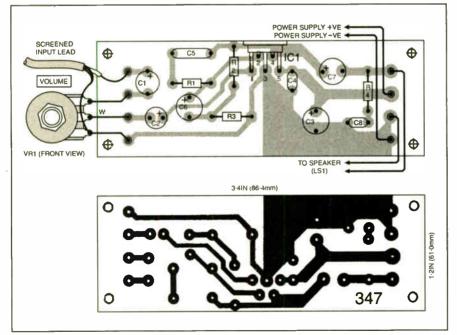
Printed circuit board component layout, full-size foil master and off-board wiring for the single TDA2003 Amplifier.
